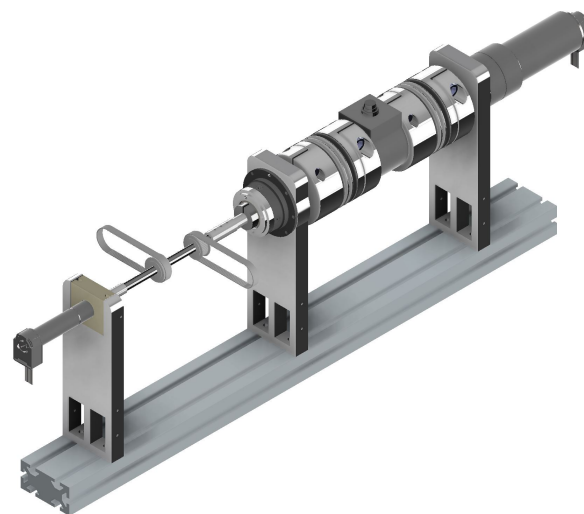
Panoramic view of the constant torque unit that is driven by a high-torque motor (EC Flat motor). Only encoders are included in this unit as measuring tools, no torque sensors.
